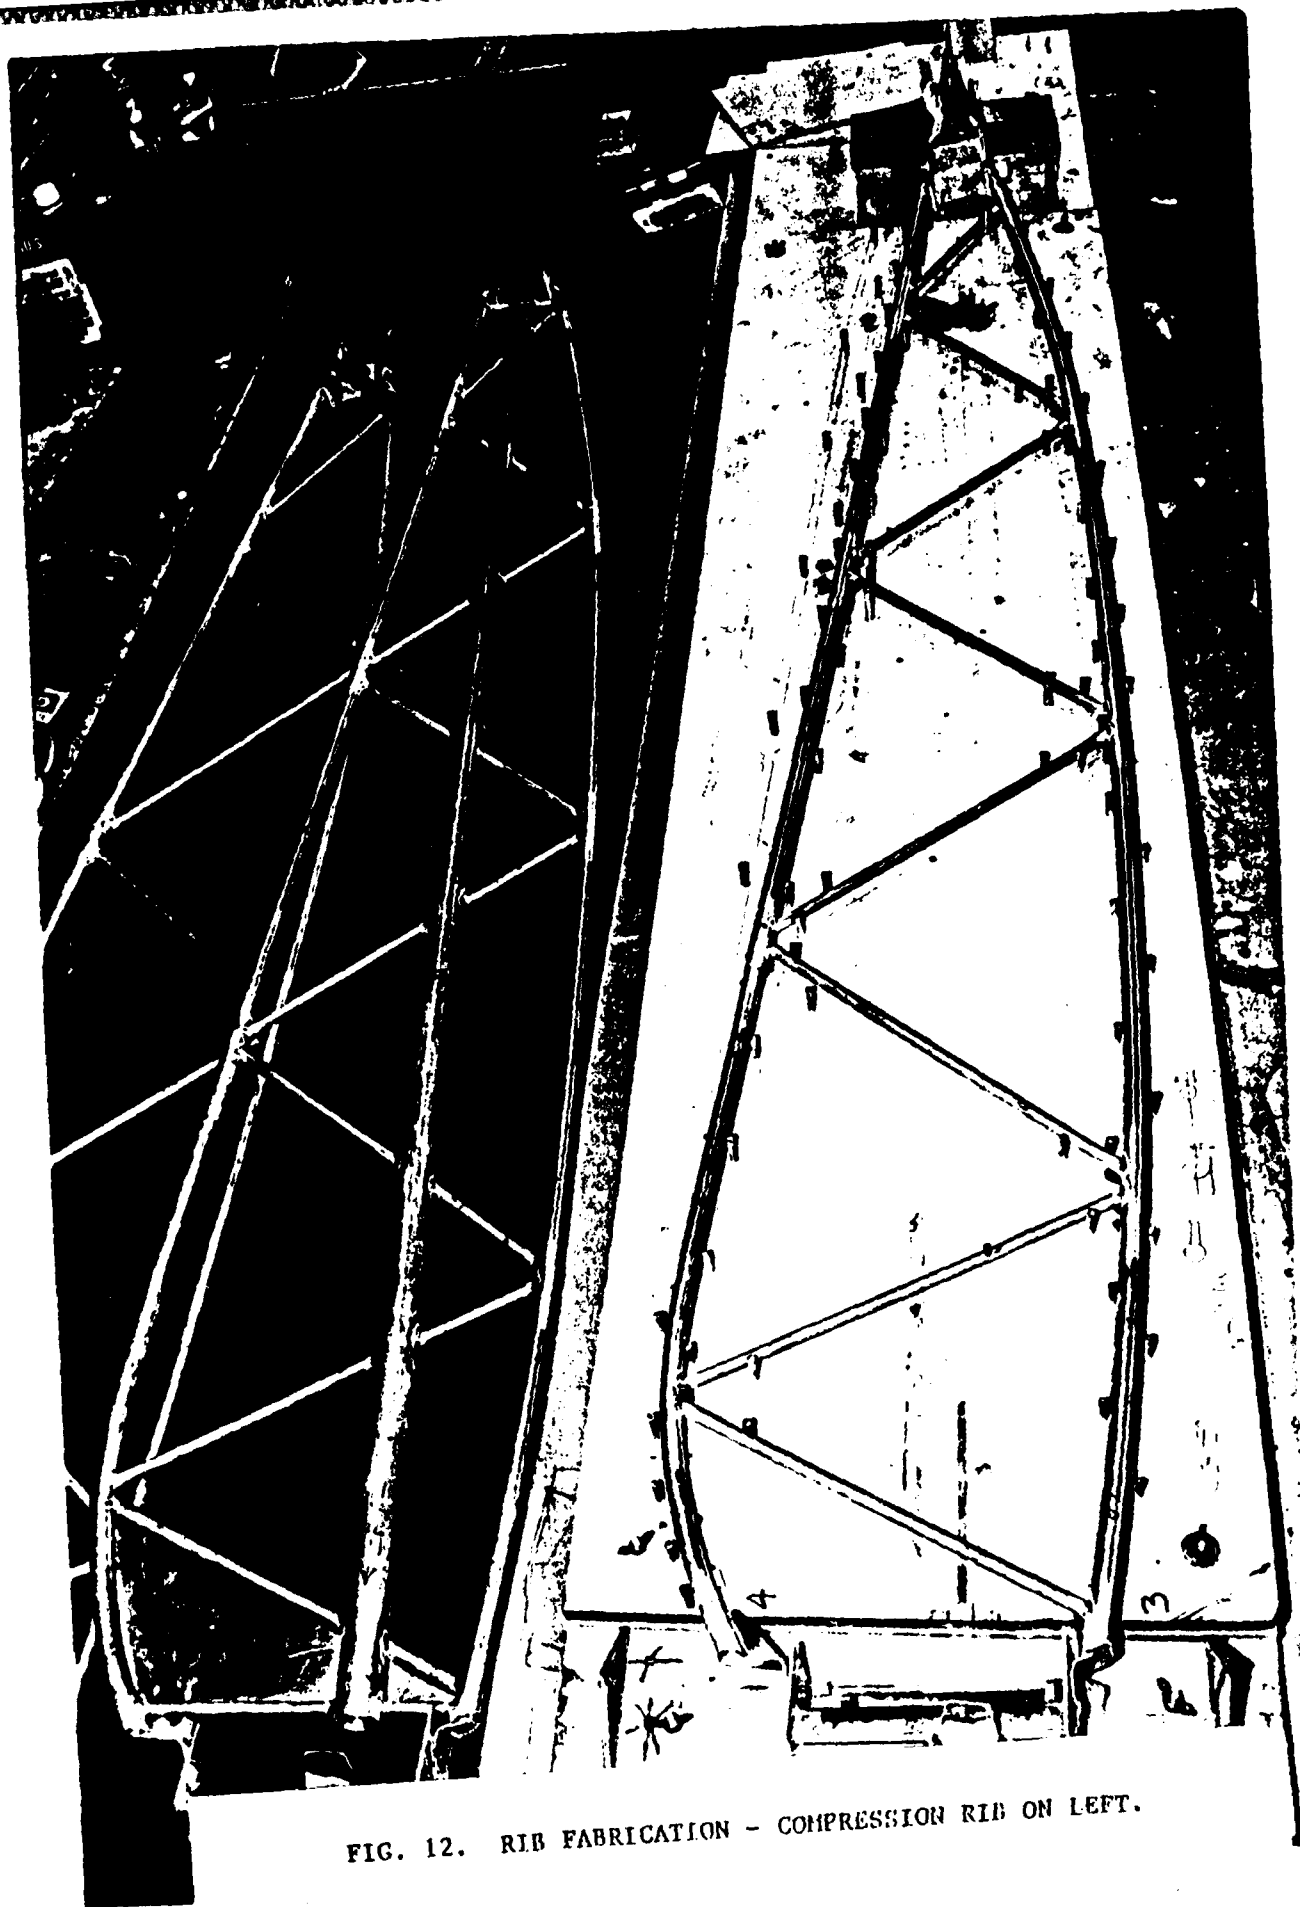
RIB FABRICATION - COMPRESSION RIB ON LEFT.
